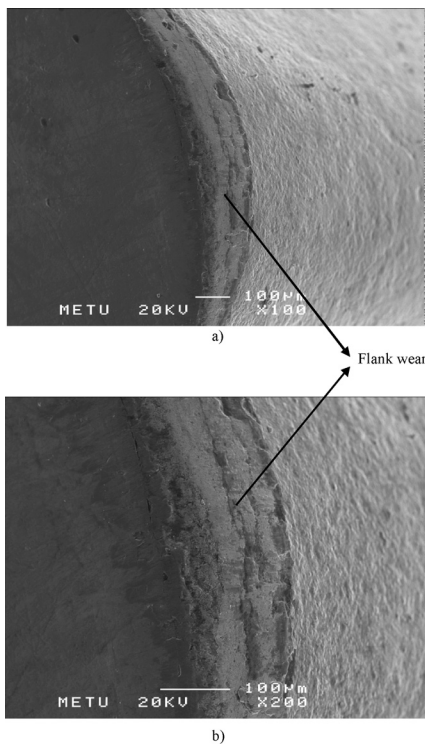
View of Tool B after machining of the low martensitic dual-phase steel a) X100, b) X200
